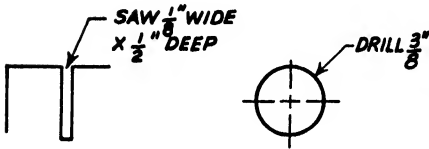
Brief notes with leaders are often used in dimensioning drawings.
